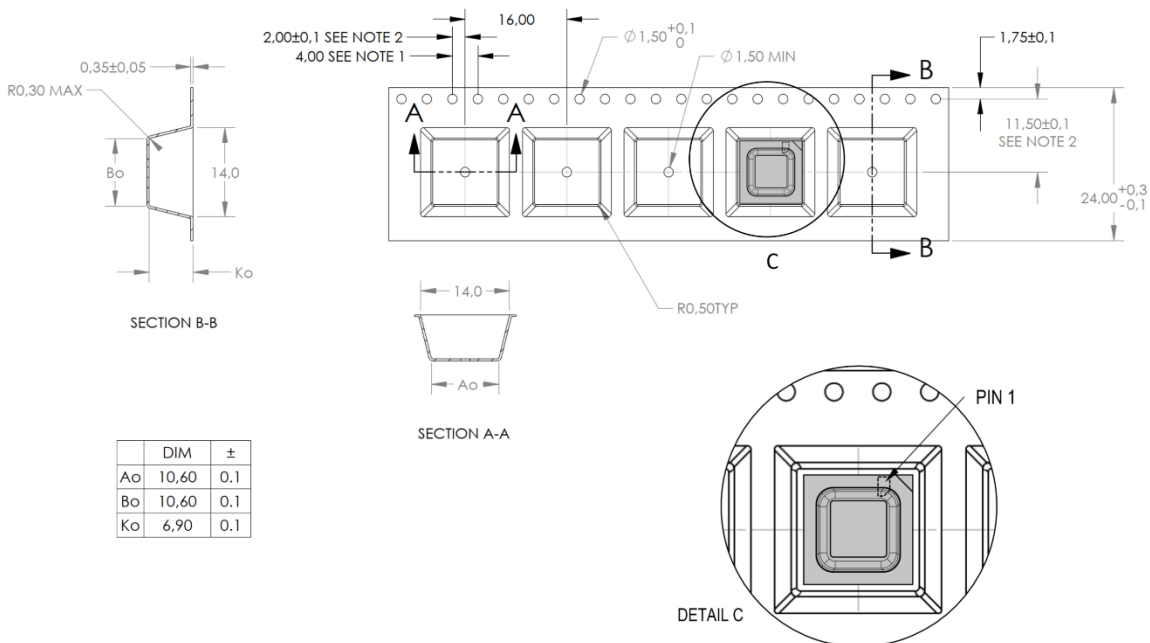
Technical drawing of the packaging tape with sensor orientation in tape. In the drawing, header tape is to the right and trailer tape to the left. All dimensions in millimeters.
